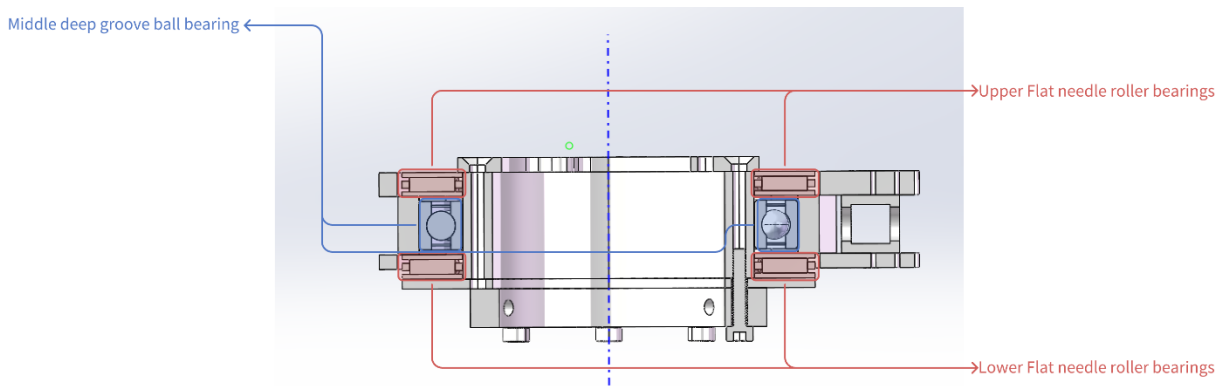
Bearings assemble cross-sectional view.
